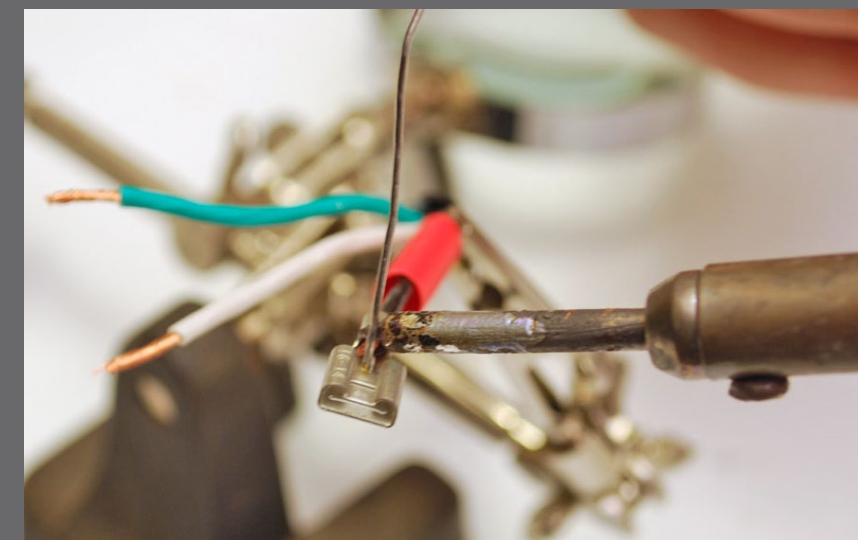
The fuse block I used has male spade terminal contacts, so I soldered a female spade terminal on the AC cord live (black) wire, making sure to slip a length of heat-shrink over the wire before soldering.
